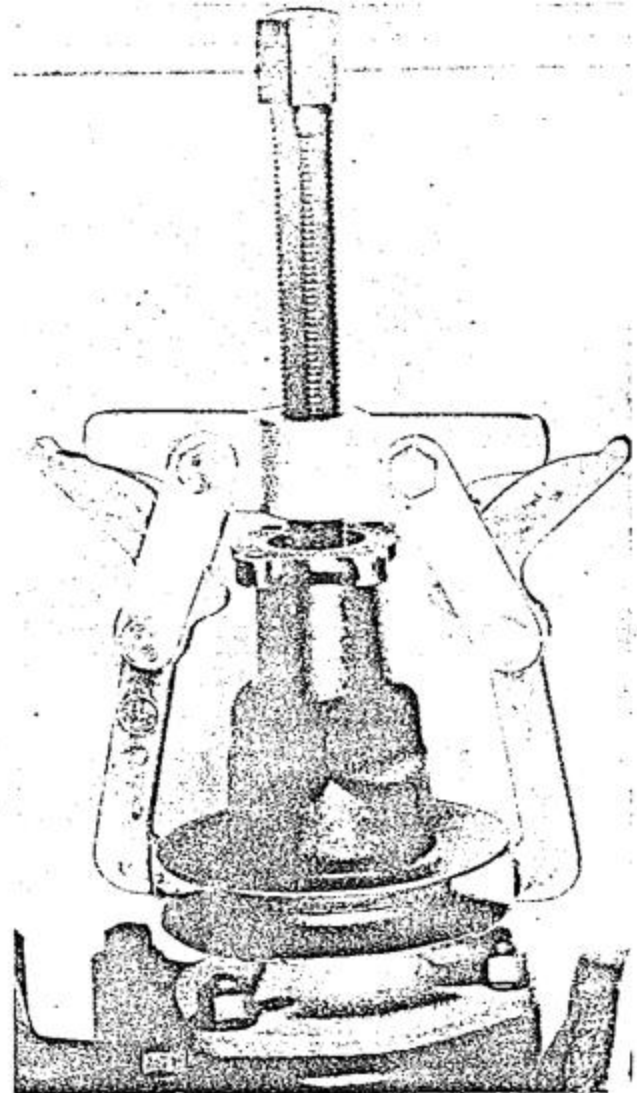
Drawing fan pulley with Churchill extractor. This extractor may also be used on crankshaft pulley.
